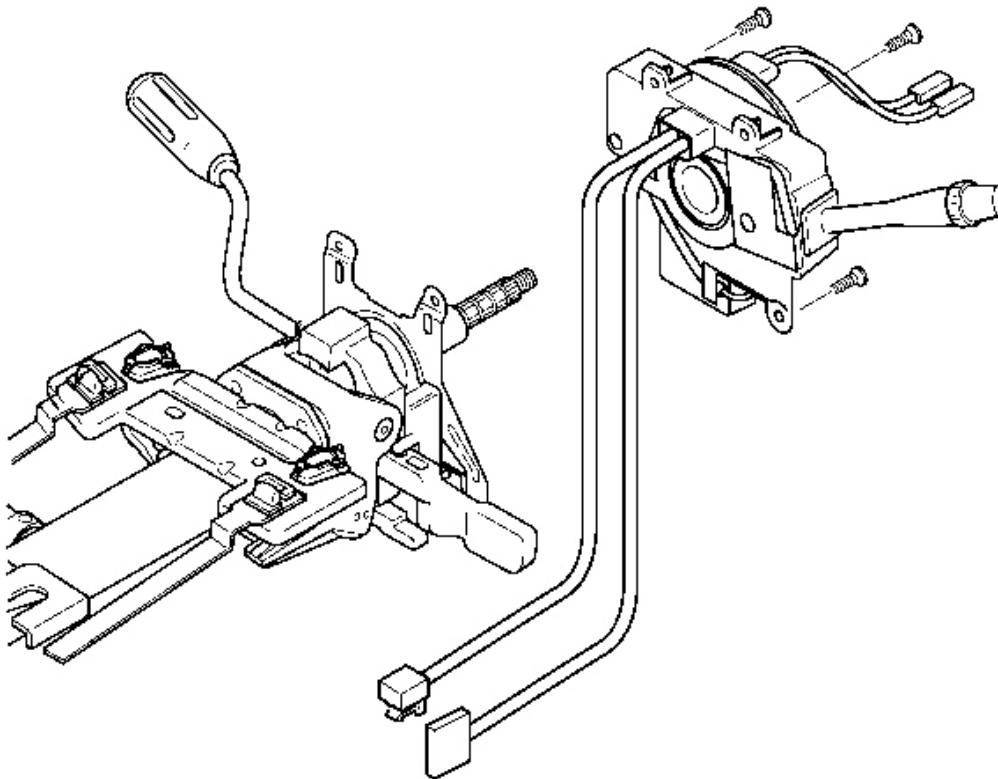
View Of Multifunction Switch/SIR Coil Assembly
